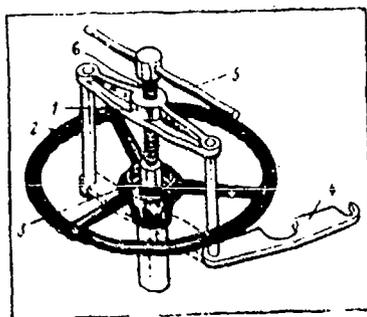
Removing the steering wheel with a model 2495 extractor
